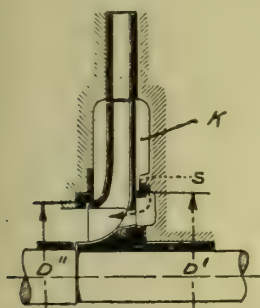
BALANCING DEVICE FOR ONE-SIDED IMPELLER.
